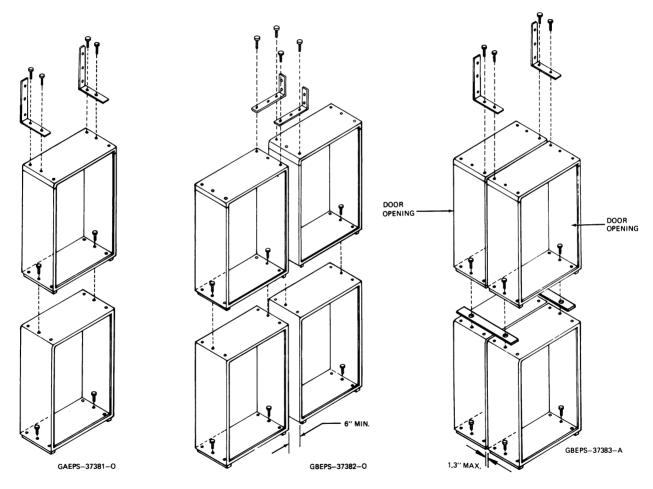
Bracket Installation for Overhead Support of Single Cabinet Stacks
